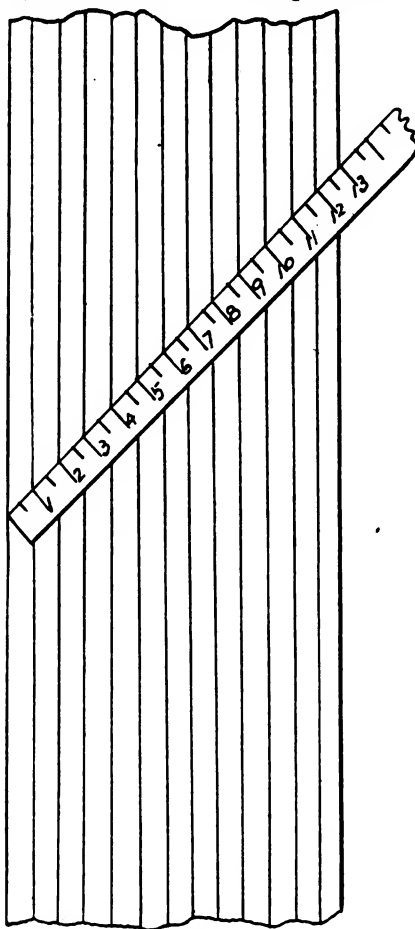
A SIMPLE METHOD FOR DIVIDING SHEETS INTO EQUAL PARTS
